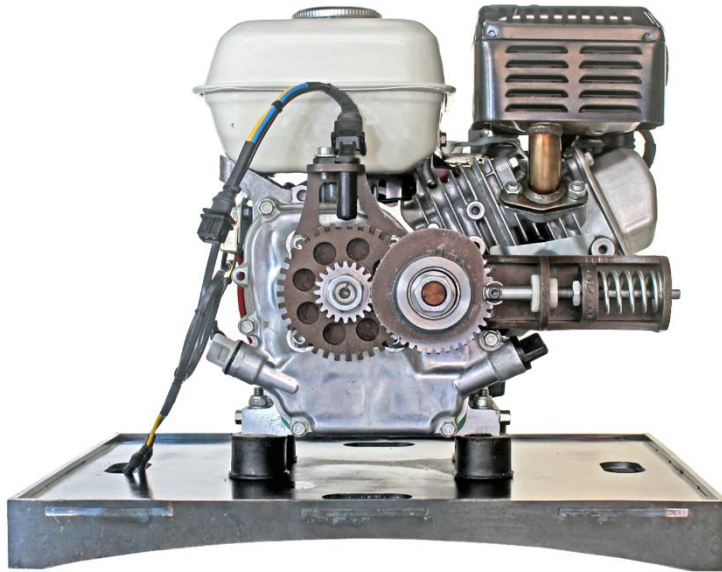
Fully assembled mechanism mounted on the Honda® GX 120 engine, including the 40-tooth gear with mounted cam, 20-tooth gear with trigger wheel, follower, and VR sensor.
